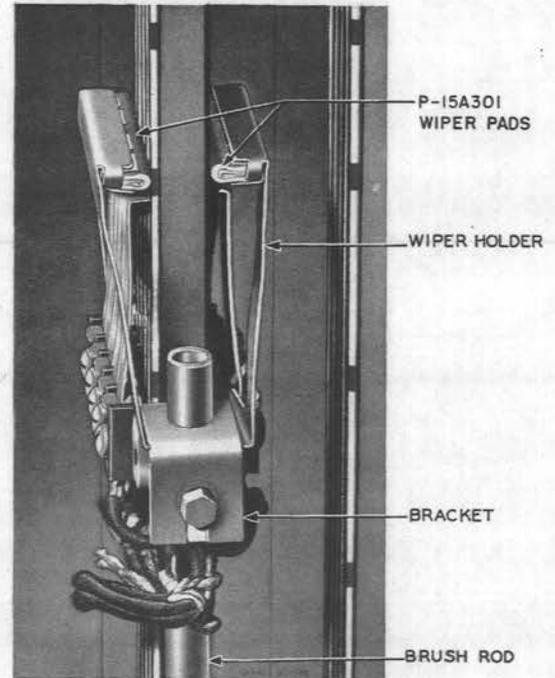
Wiper Holder, Bracket, and Pads Mounted in Place
